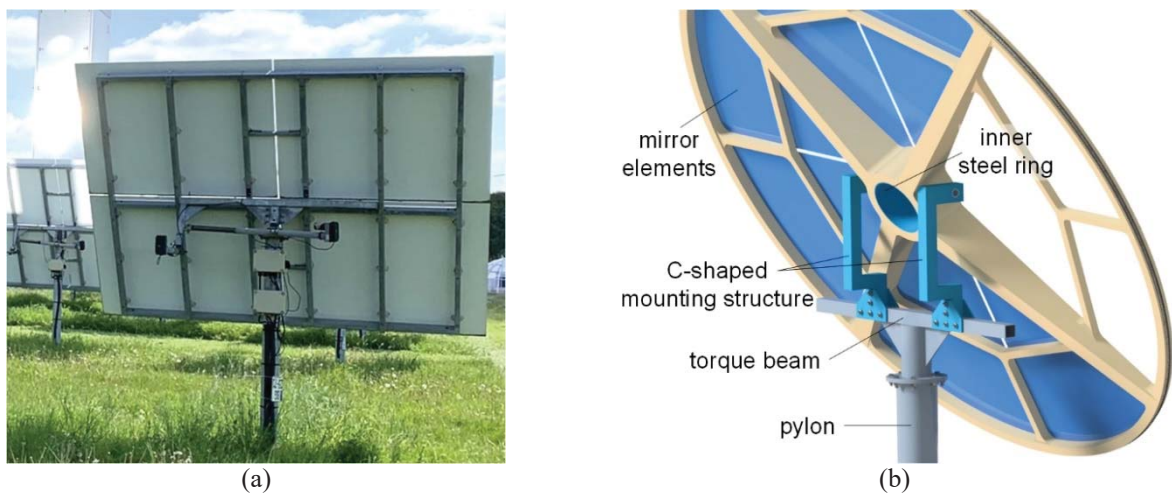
a) Steel heliostat at the solar tower Jülich, b) Additional C-shaped mounting of the concrete collector
